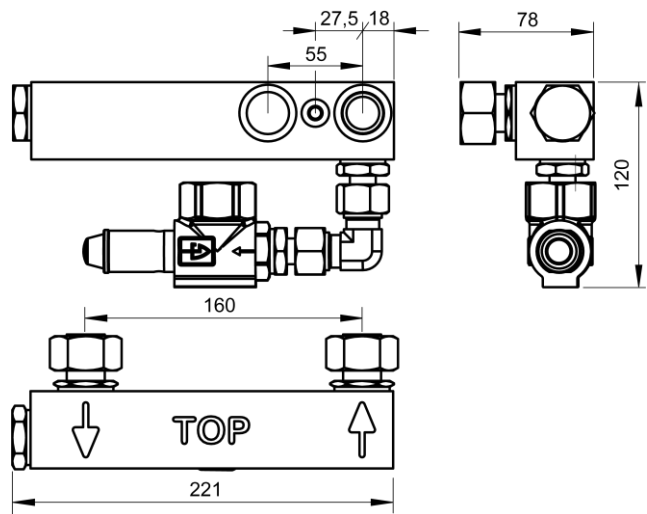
Dimension Adapter HB-200/230Z for HB-TP180-12
